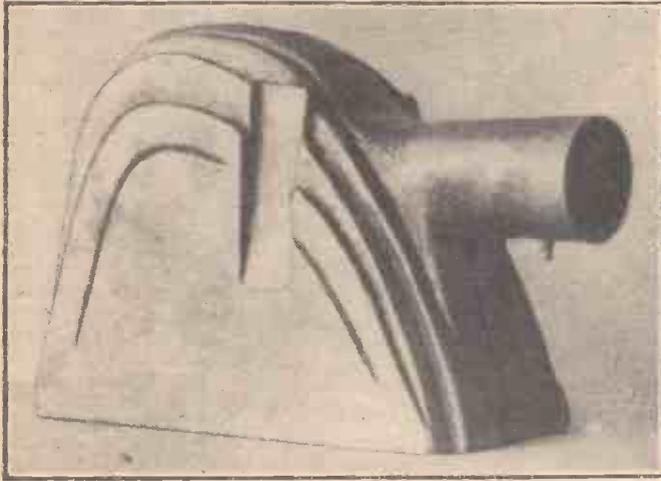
An electroformed film-projector housing shown as removed from the plating bath. The former was made of paraffin wax, hand carved.
